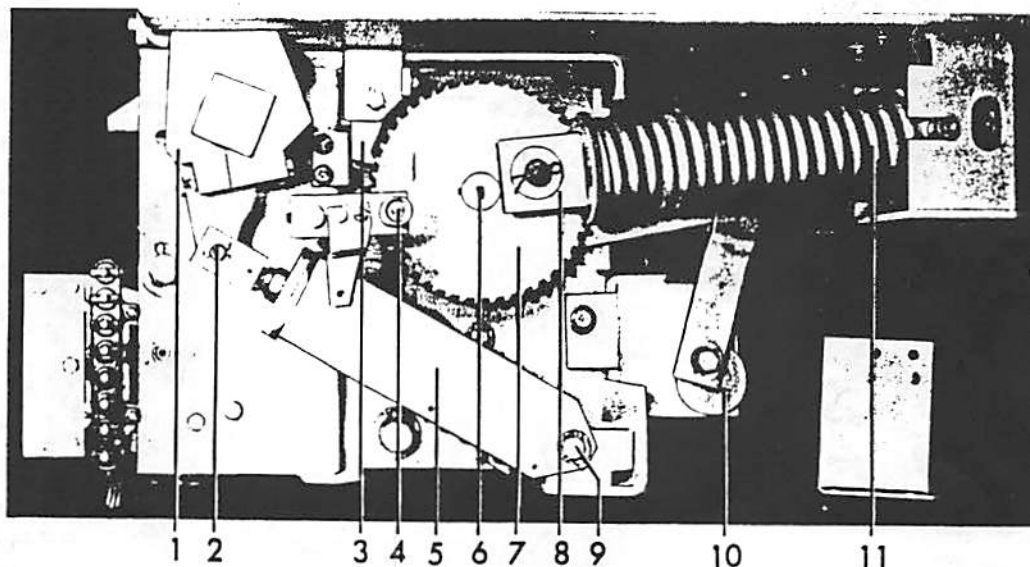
(8037377) Left Side View ML-13A Operating Mechanism
